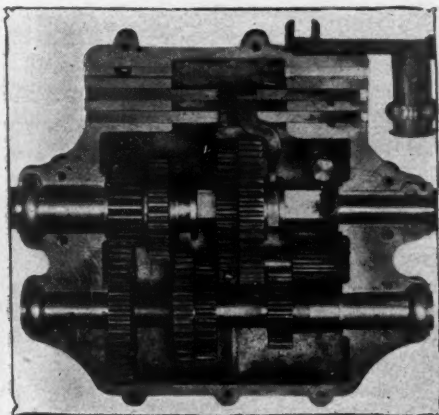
MOON GEARSET MODEL 45 IS A SELECTIVE DESIGN
